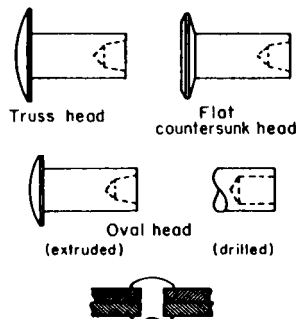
STANDARD SHAPES AVAILABLE IN SOLID RIVETS (REF. 1)
